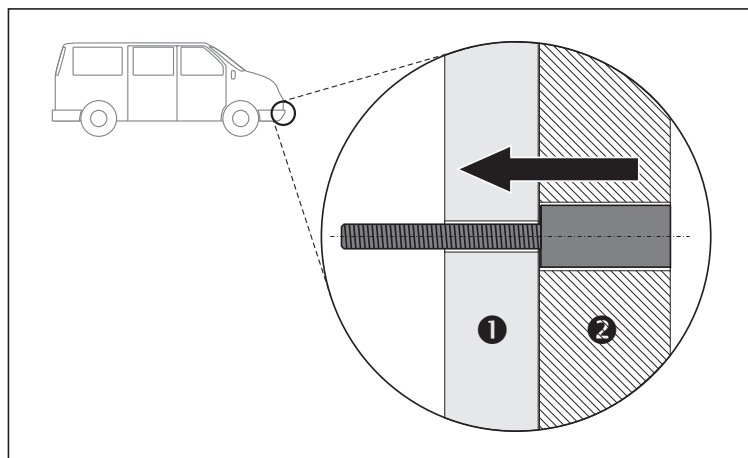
Fitting direction of spacer bolts 1 metal crossbeam, 2 skirting
